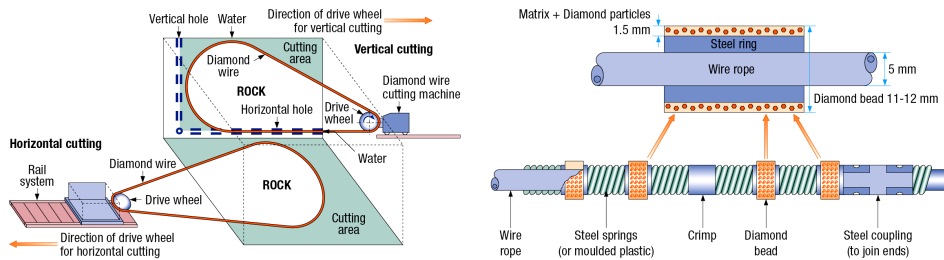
Schematic presentation of a diamond wire-cutting layout and cross-section of diamond bead [1].
